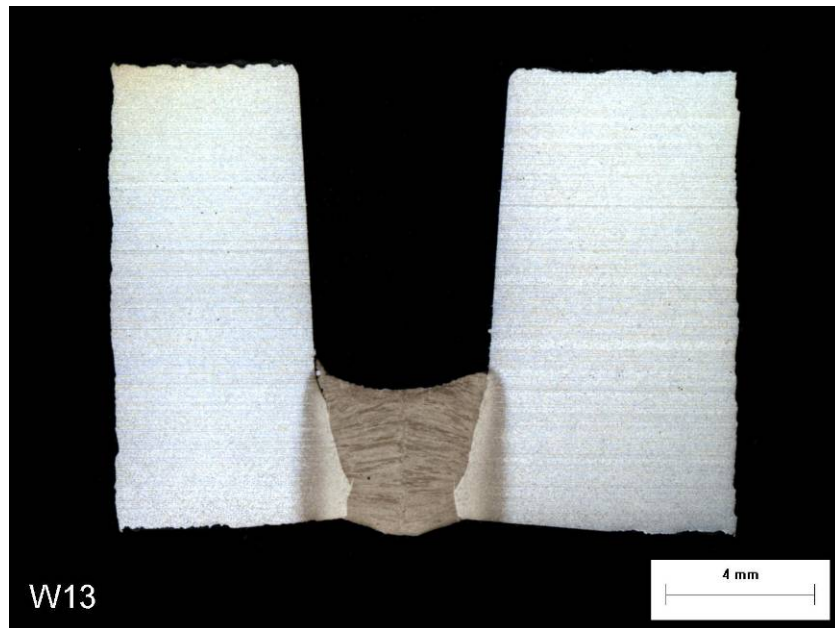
Macrosection of Spin Arc GMAW Root Pass – about 3.8-mm Throat Thickness – Showing the Full Weld Preparation
